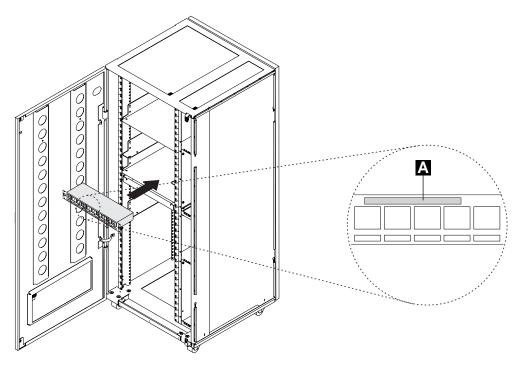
Installing the 8228 (Controller Expansion Rear side)
